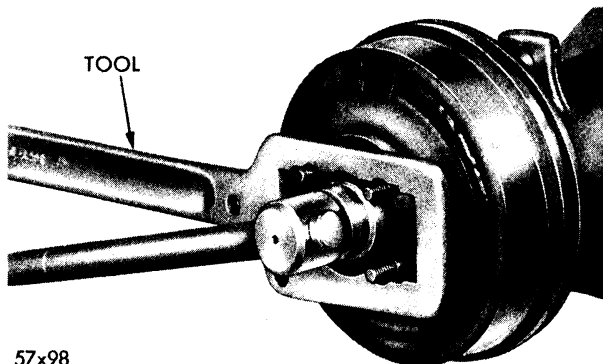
Removing Handbrake Drum and Flange (Assembly Nut)
